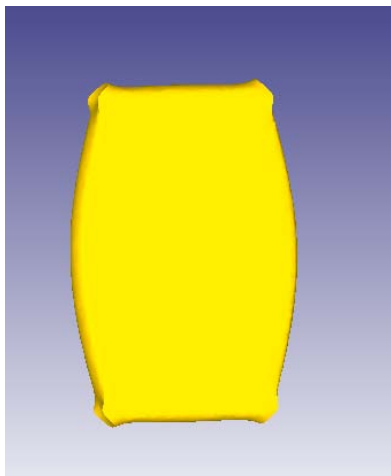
A forged rectangular billet exhibiting bulging
